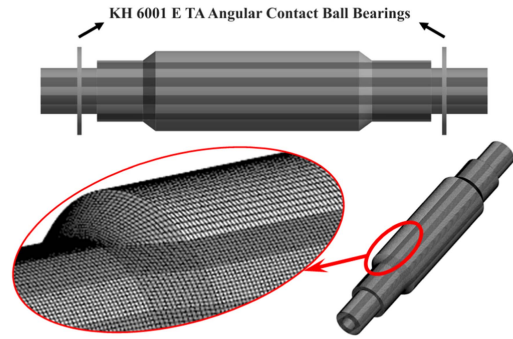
3-D models used for rotor mechanical assessment: Assembled rotor-shaft geometry (top) and finite-element mesh for static-structural analysis (bottom).
